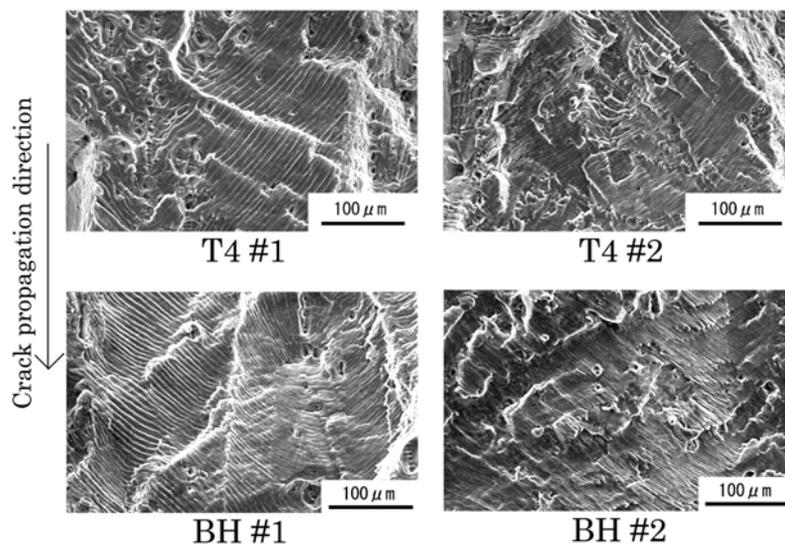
Fracture surfaces being 3mm in apart from the notch point.
